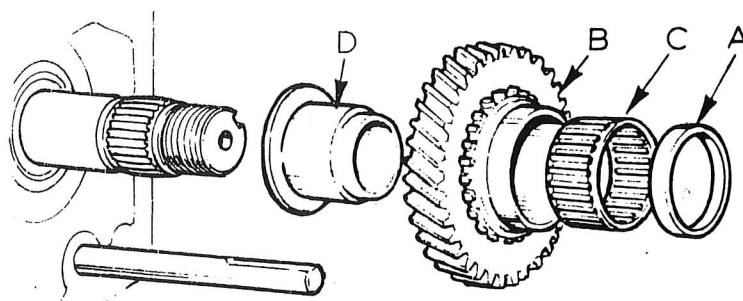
5th. GEAR, BEARING, SPACER AND HUB
